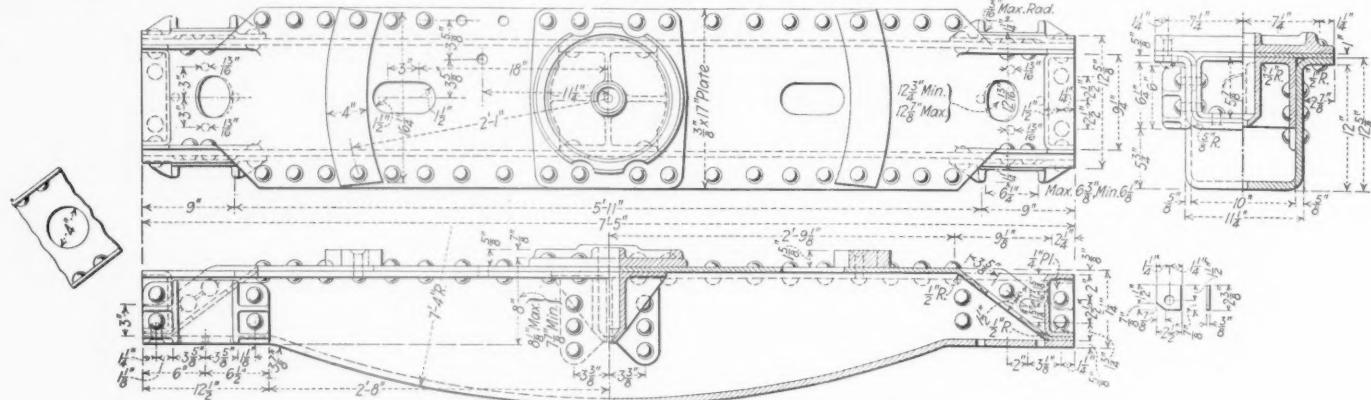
Pressed Steel Bolster for the Standard 50-Ton Truck
